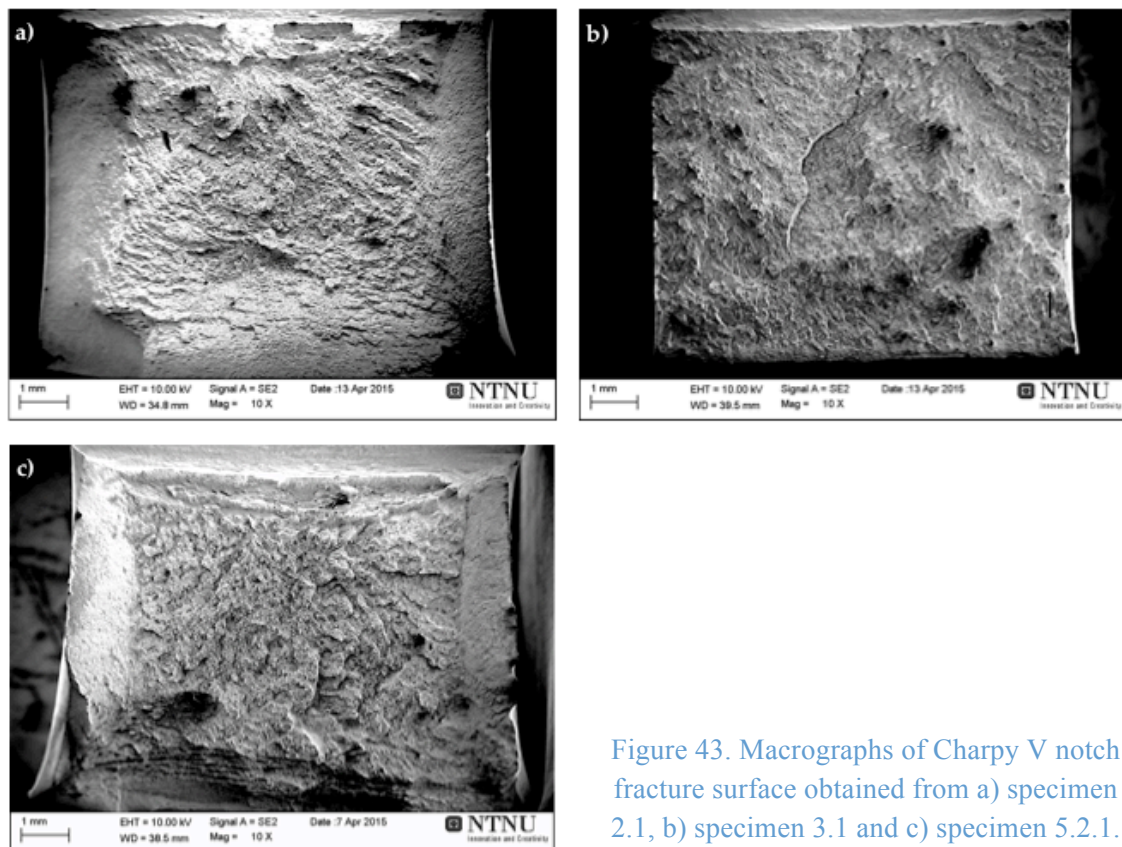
Macrographs of Charpy V notch fracture surface obtained from a) specimen 2.1, b) specimen 3.1 and c) specimen 5.2.1.
